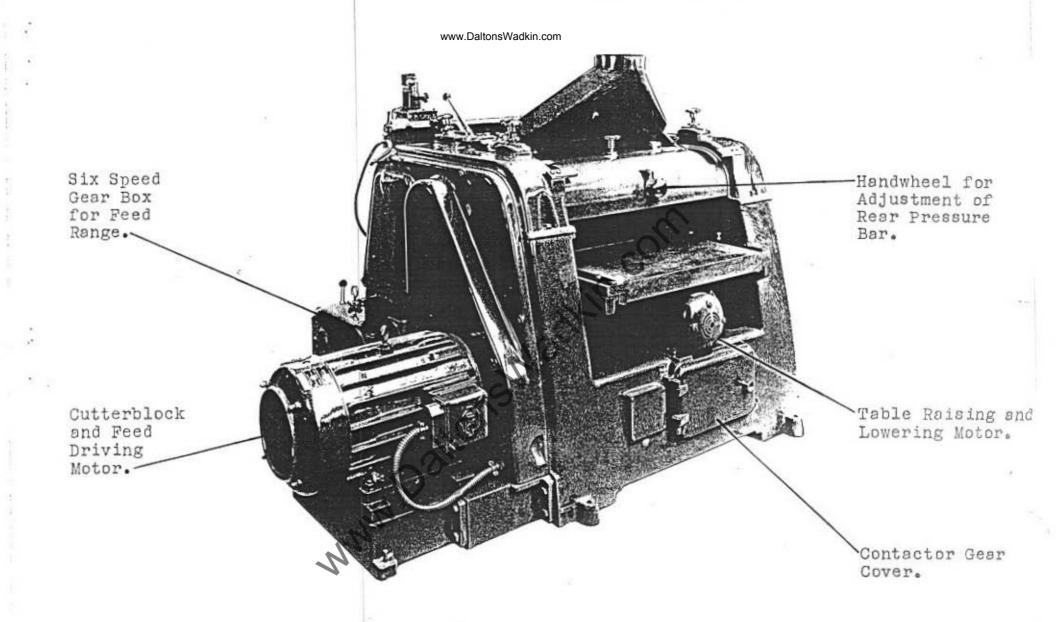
GENERAL REAR VIEW OF MACHINE.
